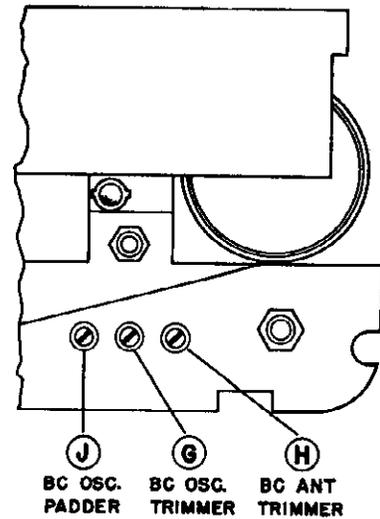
Front Right View of Chassis Showing Location of Alignment Adjustments
